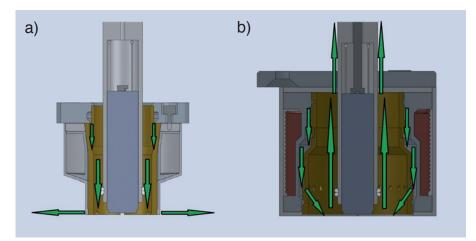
• Additional fixture with different degassing concepts to create magnetic field and shielding gas cover: a) small size up to M12, b) larger fixture for M16 with changed gas flow direction.
